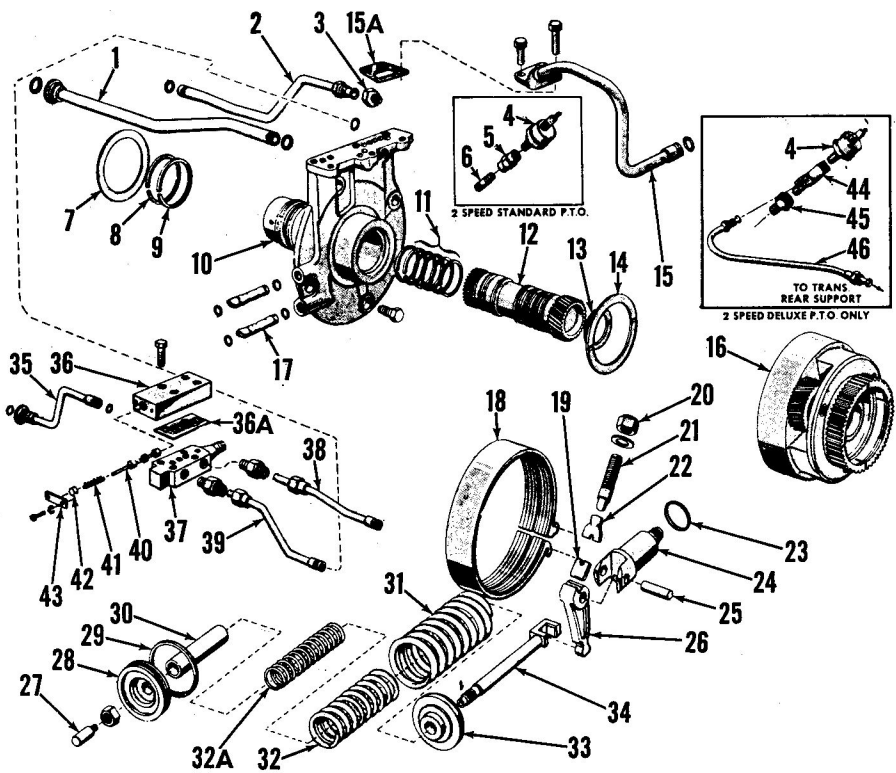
Exploded view of distributor, "C" carrier, No. 3 band assembly, direct drive shuttle valve and related parts.
